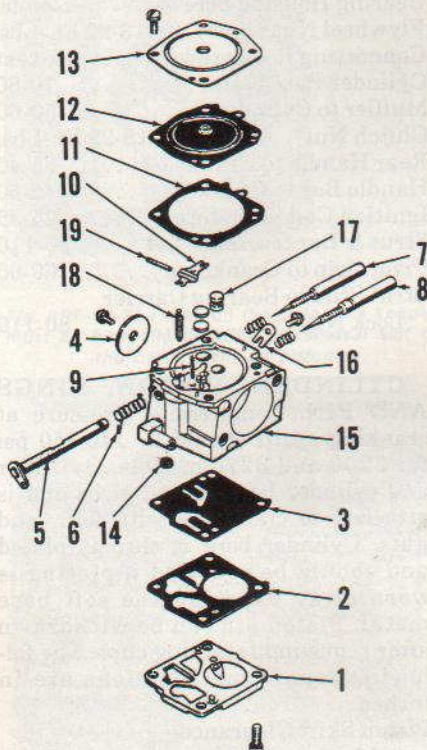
Exploded view of Tillotson HS carburetor.
